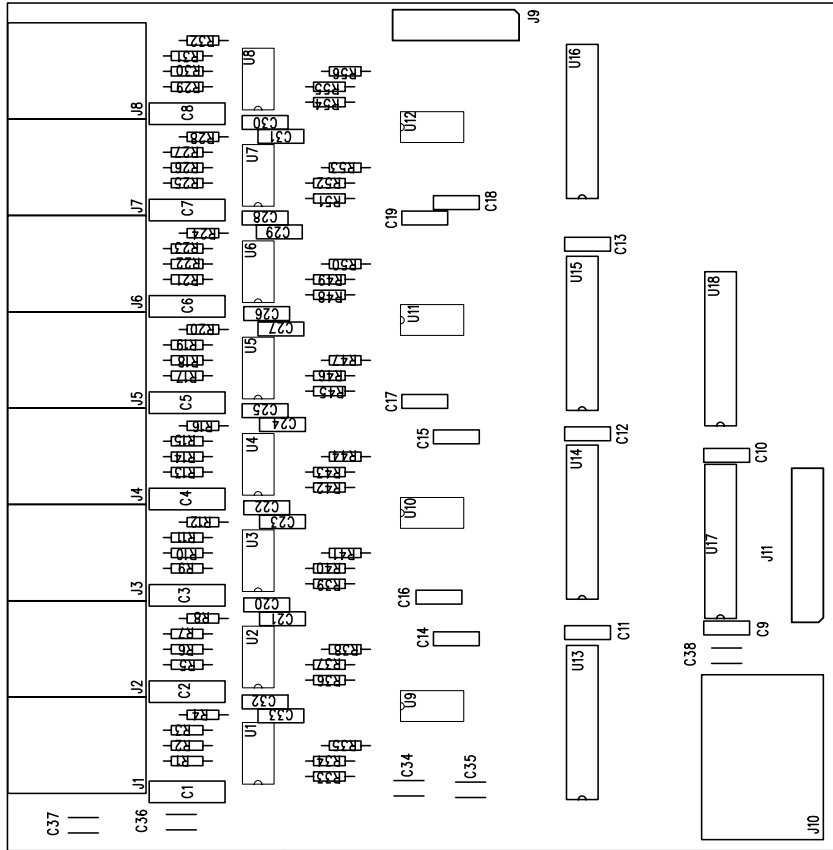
Audio input module PCB, silkscreen/assembly drawing.
